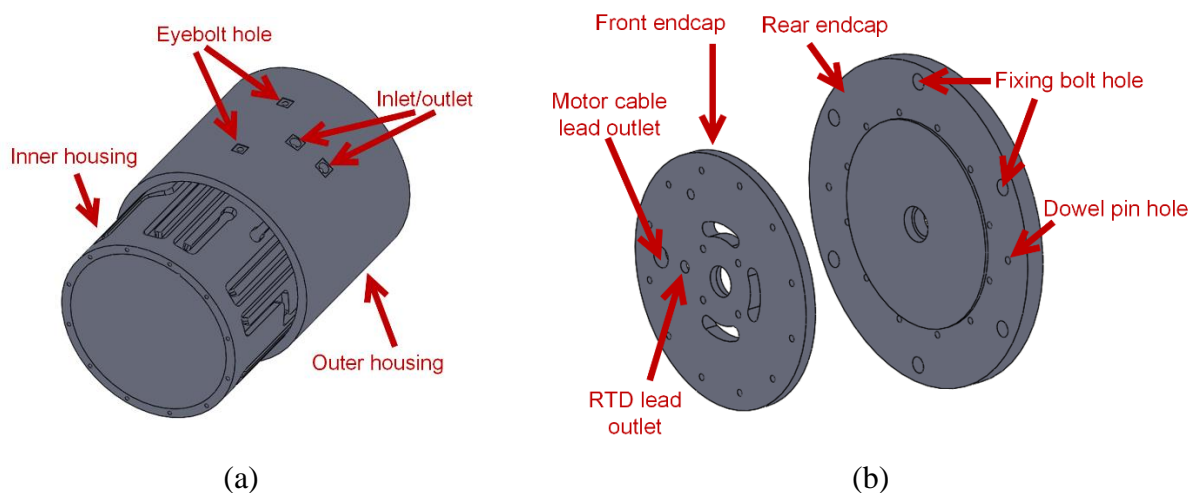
CAD drawing of the housing (a) Water jacket and (b) Front and rear end caps
